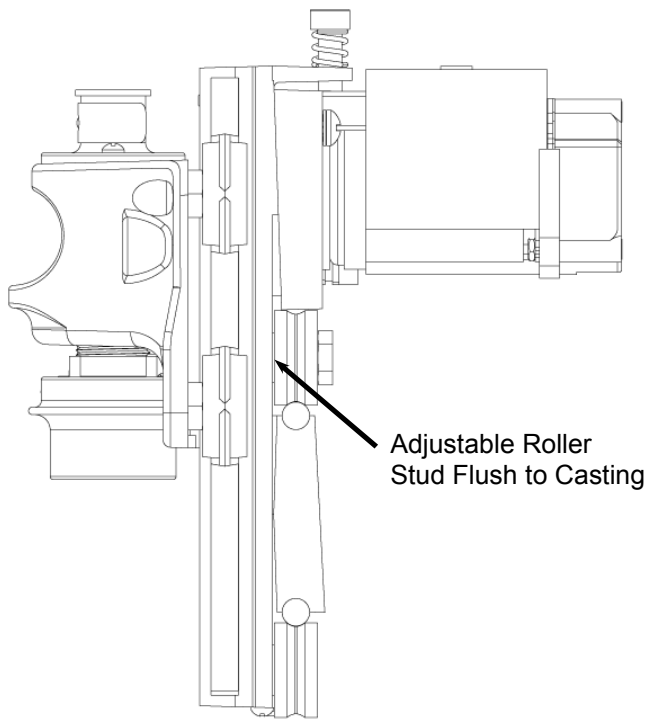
SIDE VIEW OF A PROPERLY INSTALLED Y-TRUCK
